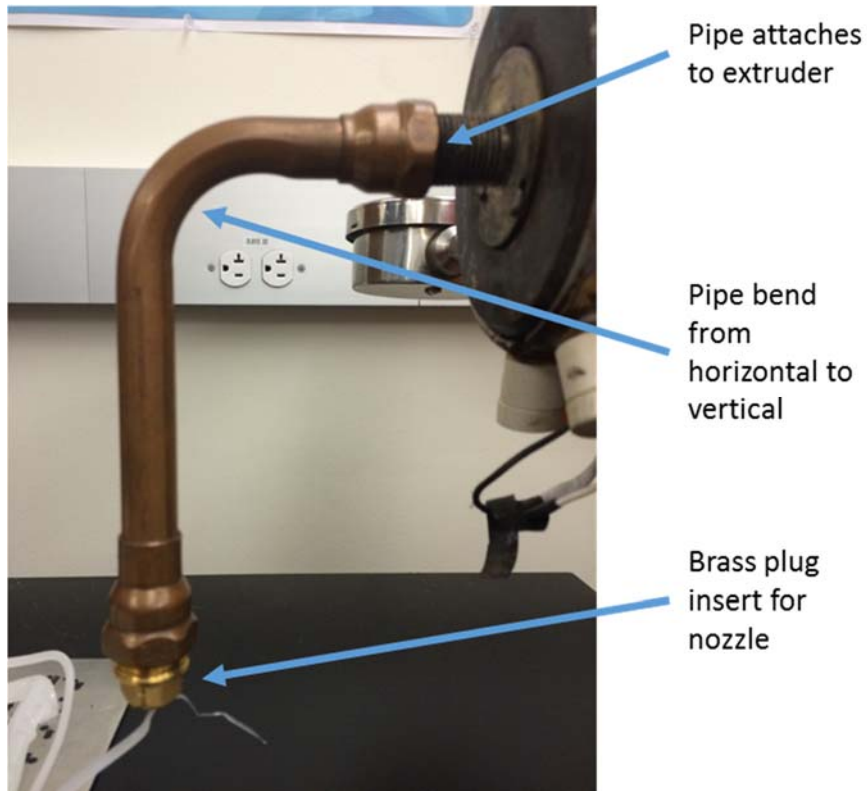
Brabender 90° attachment for vertical extrusion.
